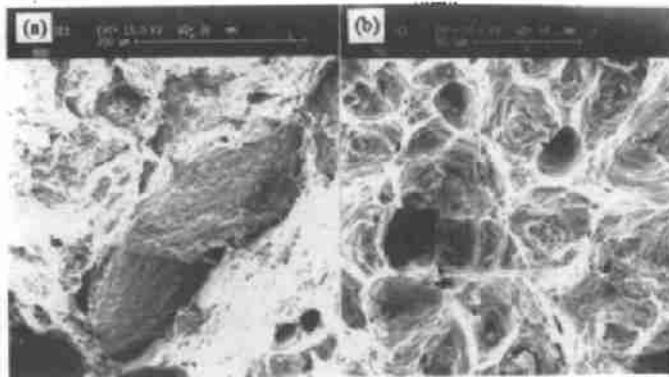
Fracture surface of the specimens fracture at 900 °C and 750 °C respectively
